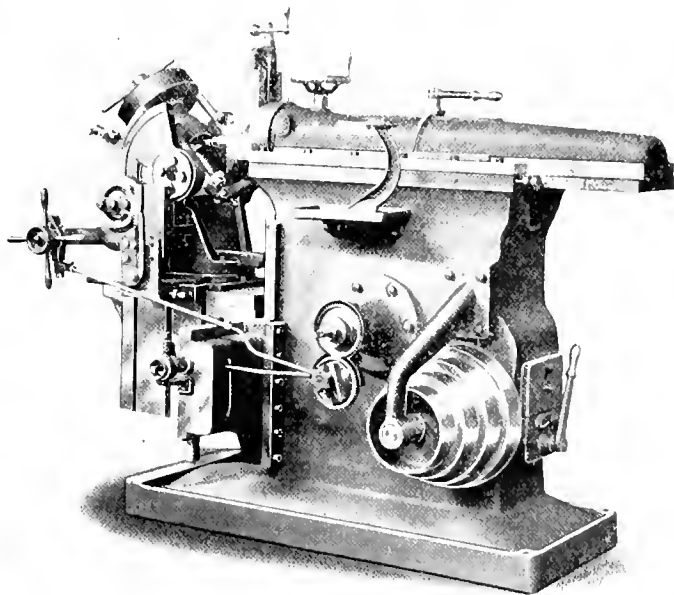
An American Shaper Attachment employing a Templet for Controlling the Shape of the Bevel Gear Tooth produced.
